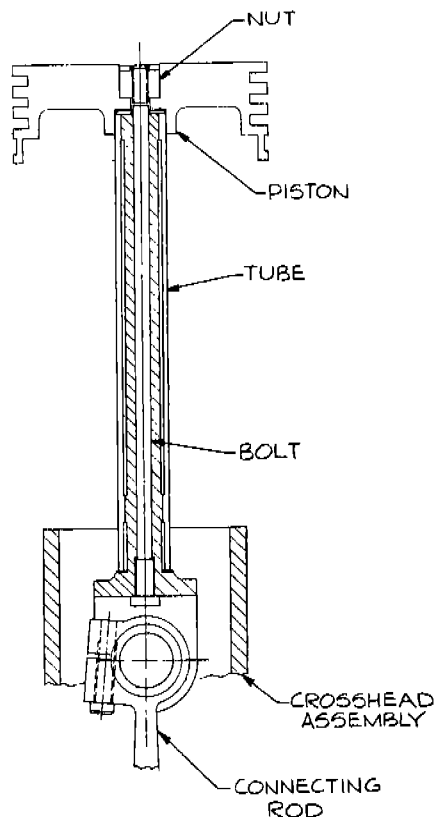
CROSS-SECTION OF PISTON AND BOLT ASSEMBLY.
